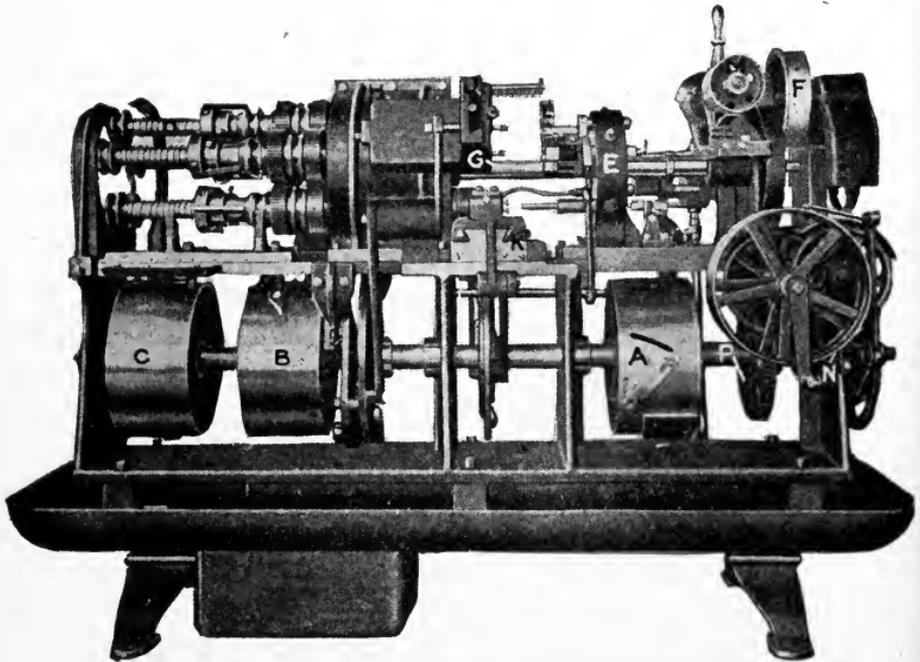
Universal Multiple-Spindle Automatic Screw Machine
